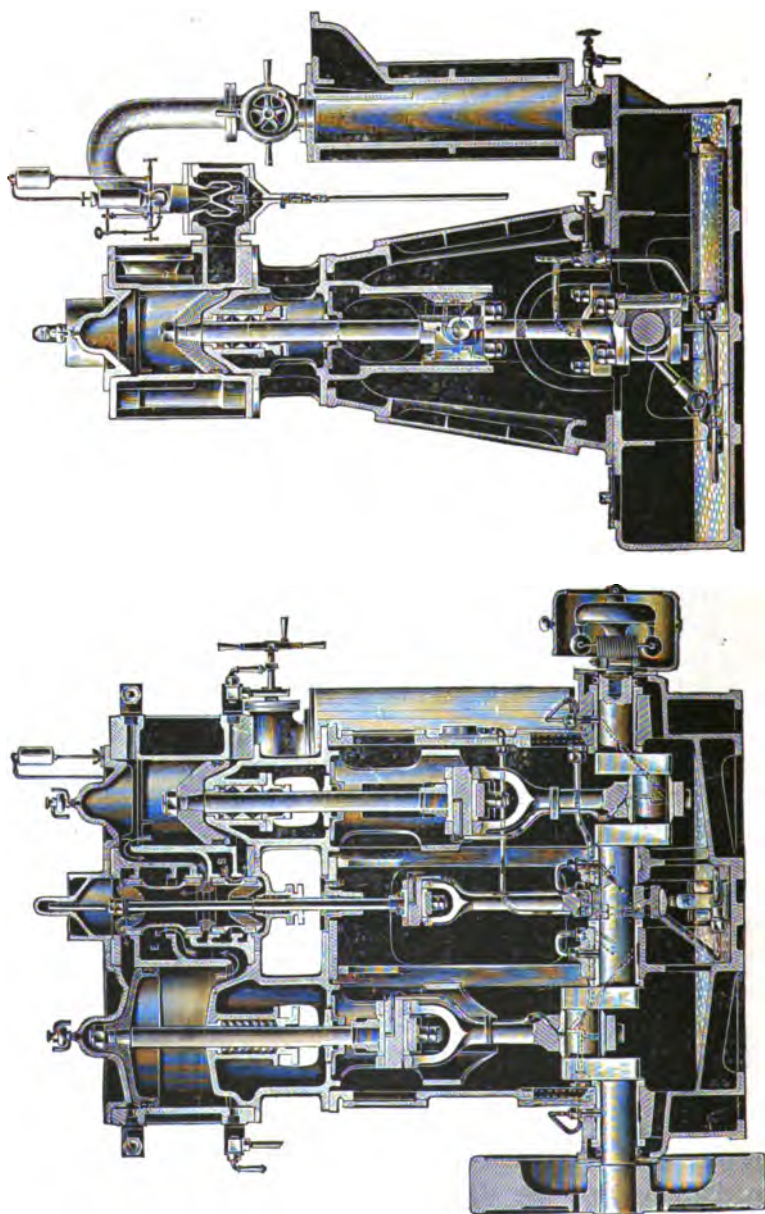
SECTIONAL DRAWING OF THE BELLISS COMPOUND ENGINE.
